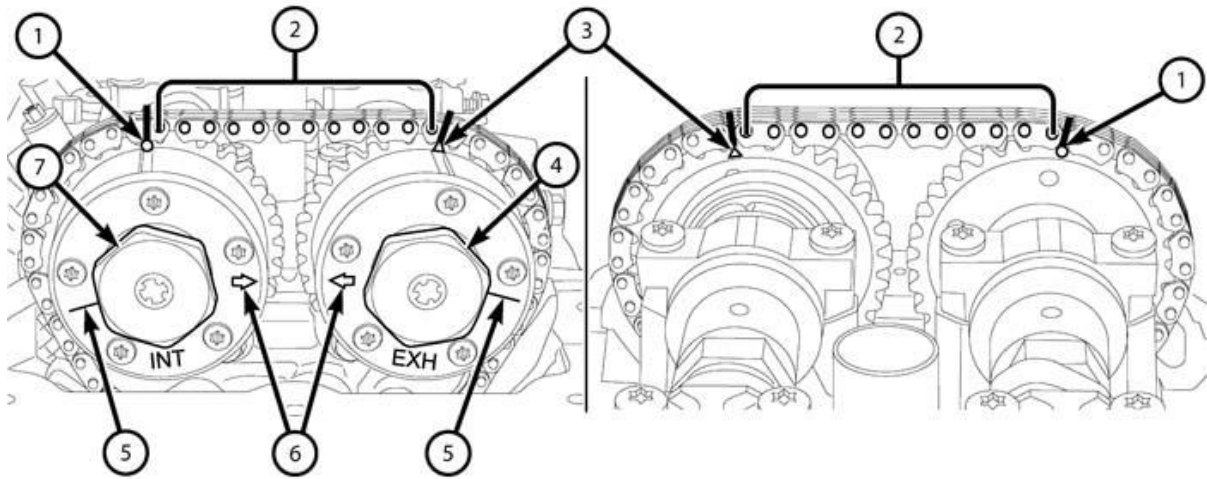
Arrows, Scribe Lines & Cylinder Head Cover Mounting Surface
